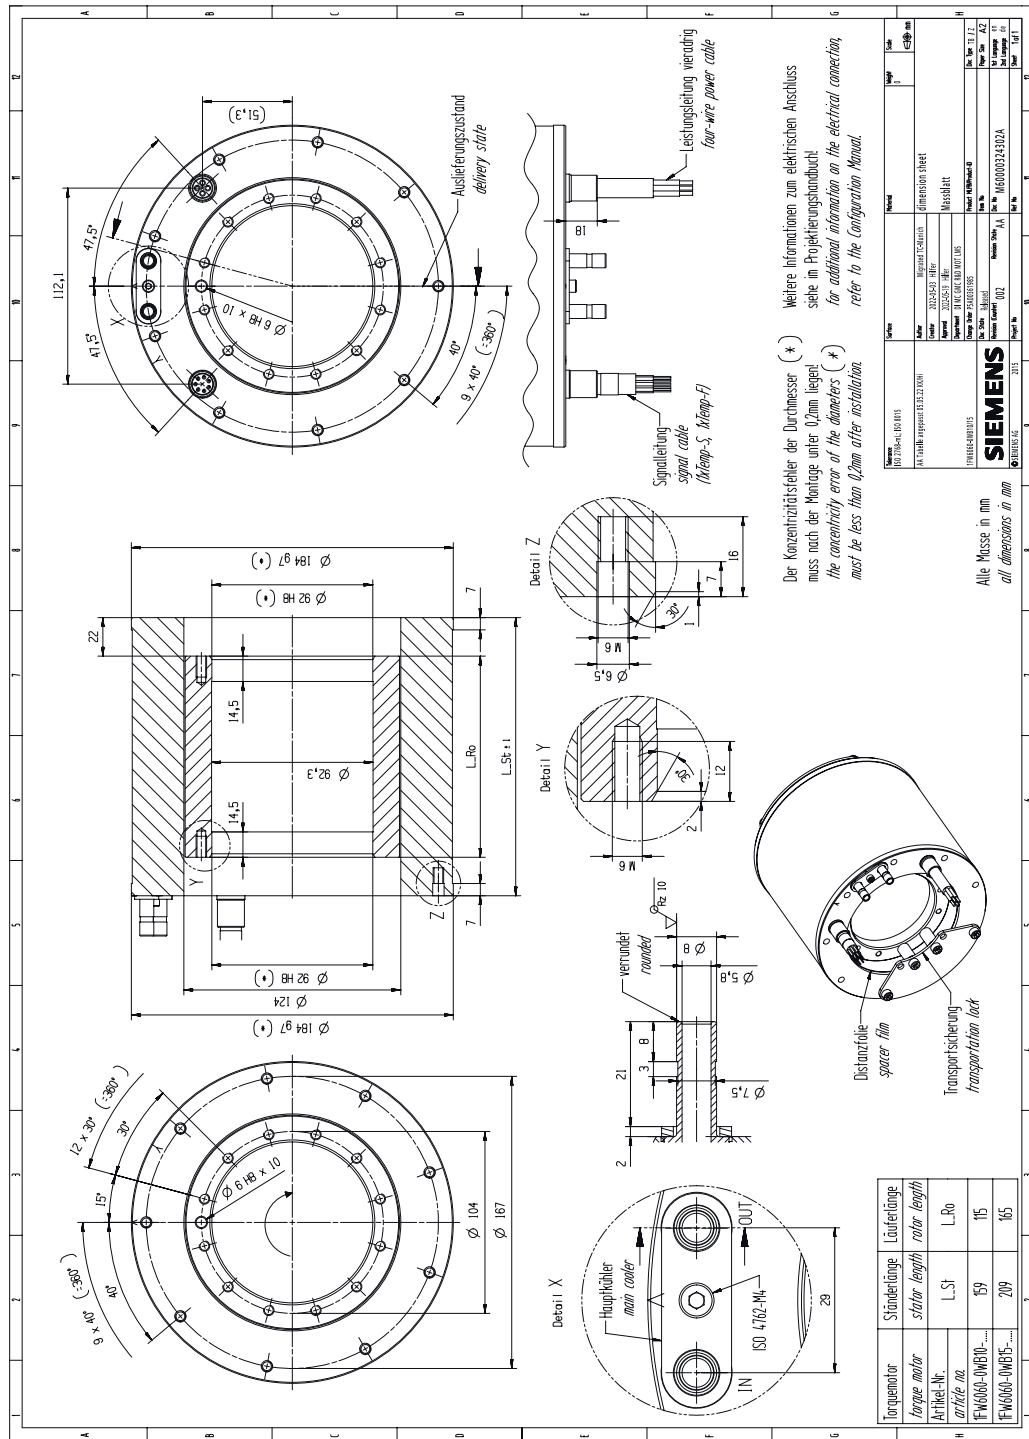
1FW6060-xxB (active part length 10 and 15, axial electrical connection with sleeve)
